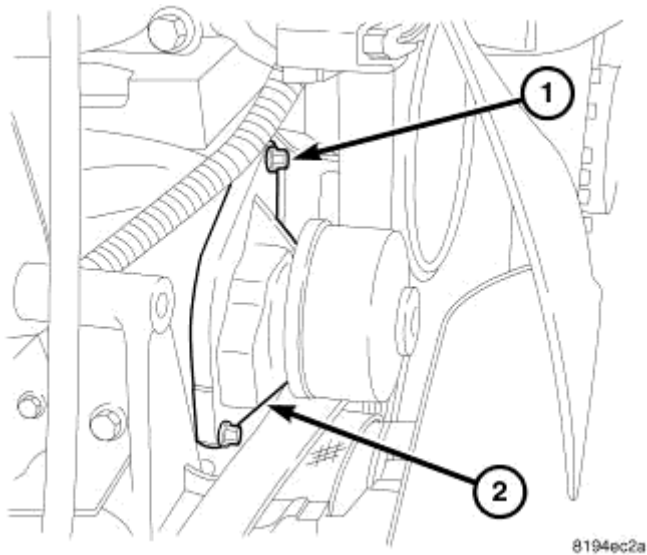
Thermostat Housing, Water Pump, Belt Tensioner, & Idler Pulley
